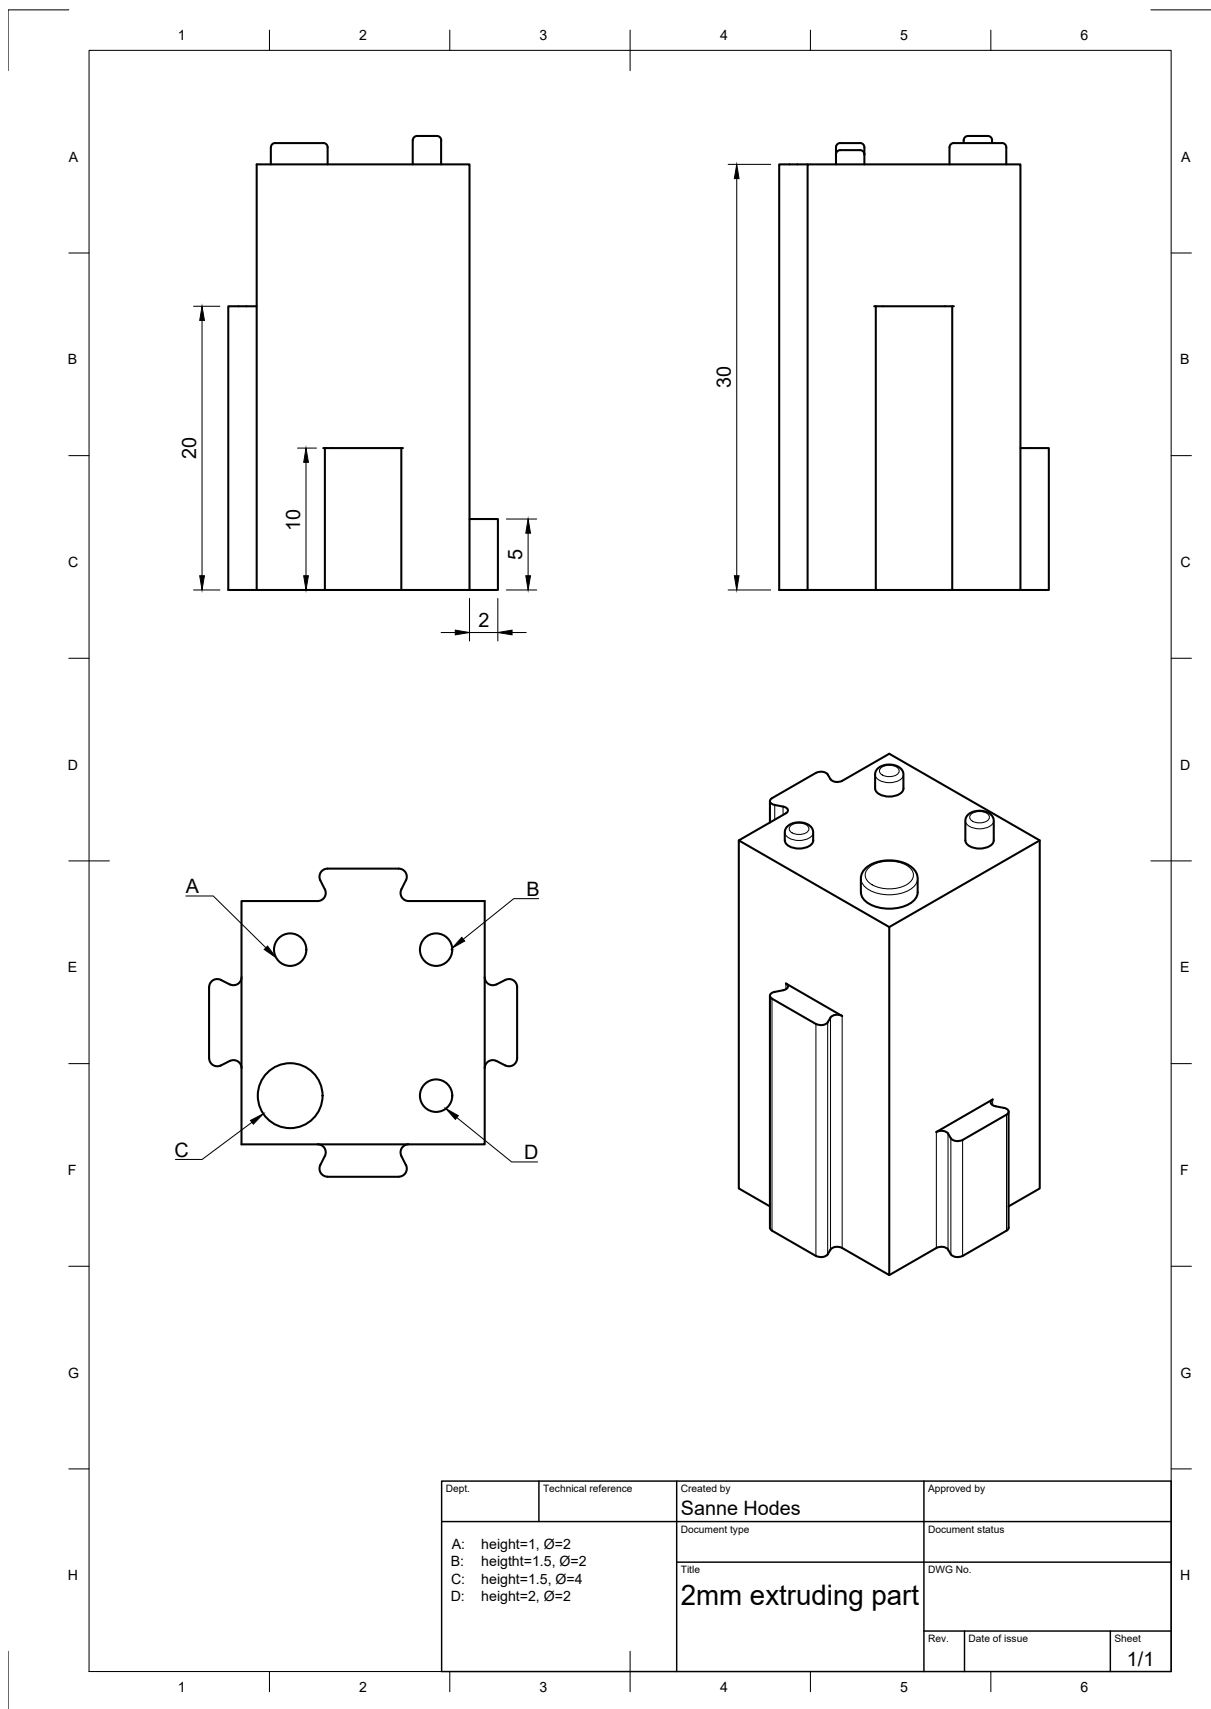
Technical drawing of the test cube with the 2 mm extruding part
